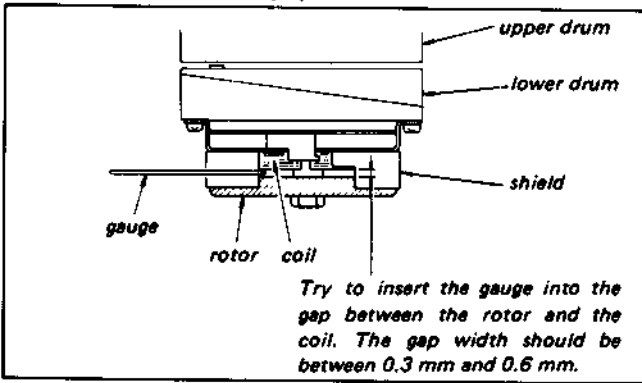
Checking the motor gap width after replacing the drum assembly
